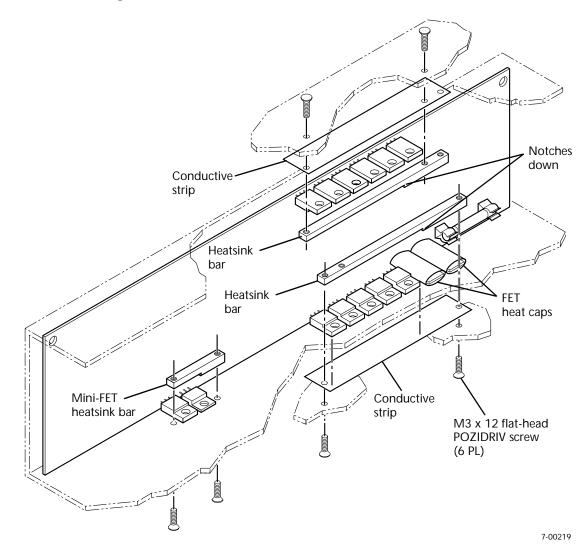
Heatsink bars and conductive strips on BBU PCB
